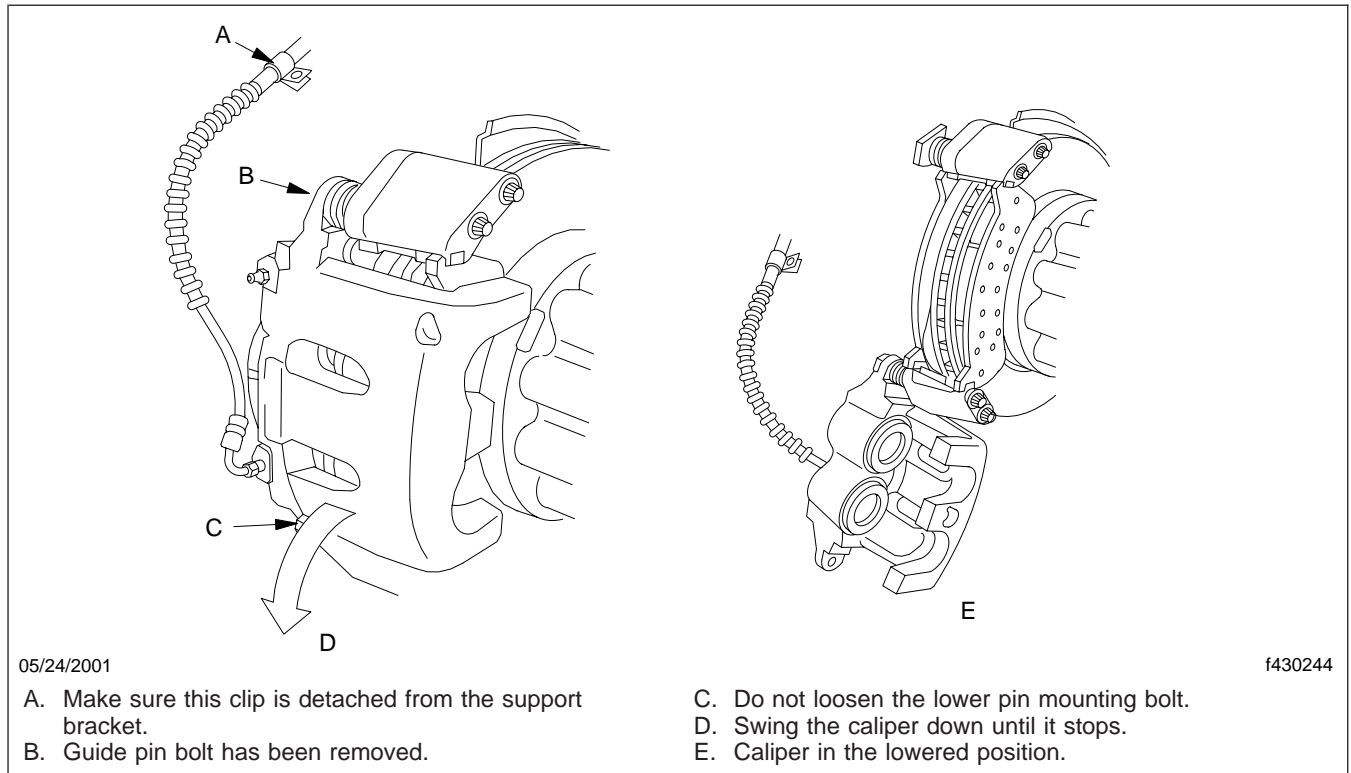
, Open Caliper to Access Brake Pads and Pistons
